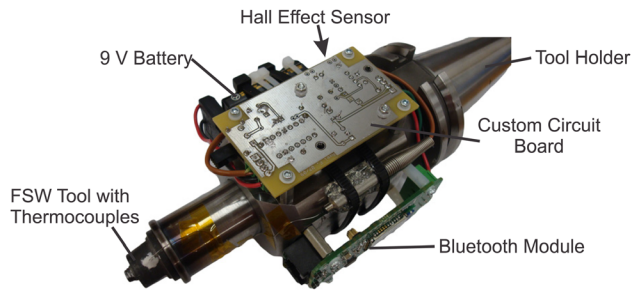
Photograph of assembled instrumented tool holder for FSW
